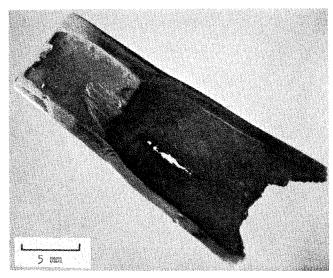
Failure of type 347 tubing under burn-out conditions.
